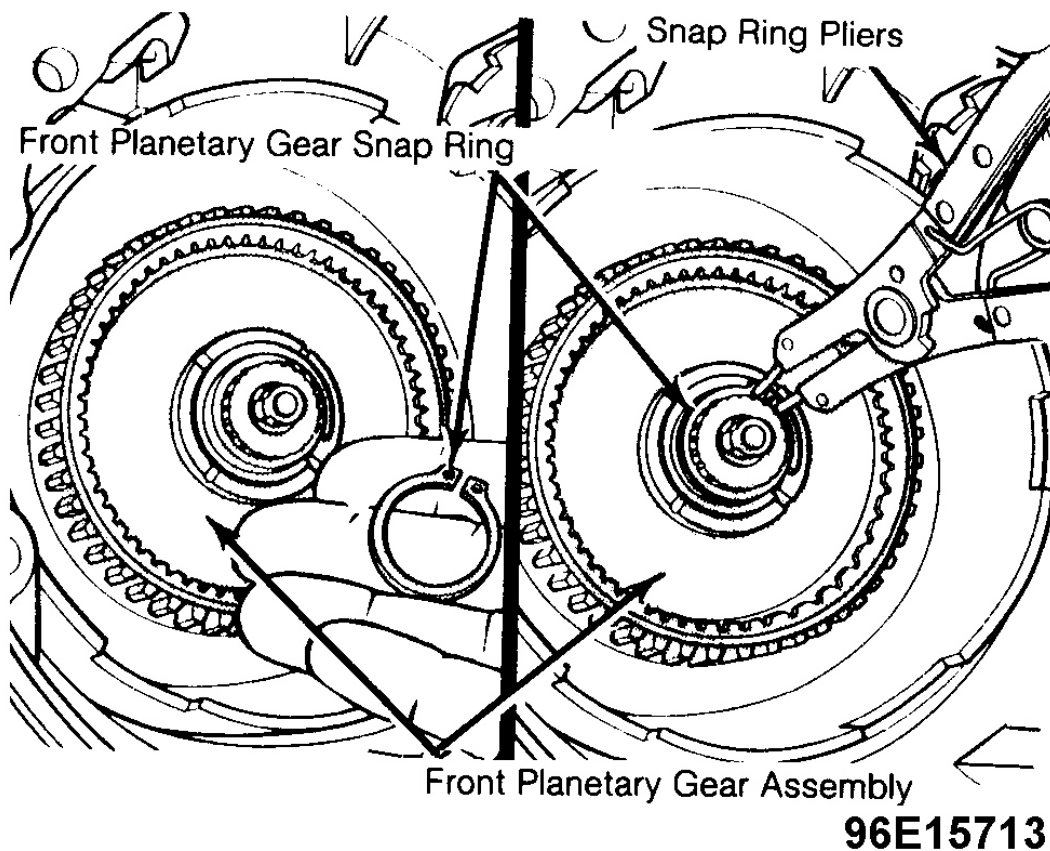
Installing Front Planetary Gear Assembly Retaining Snap Ring
